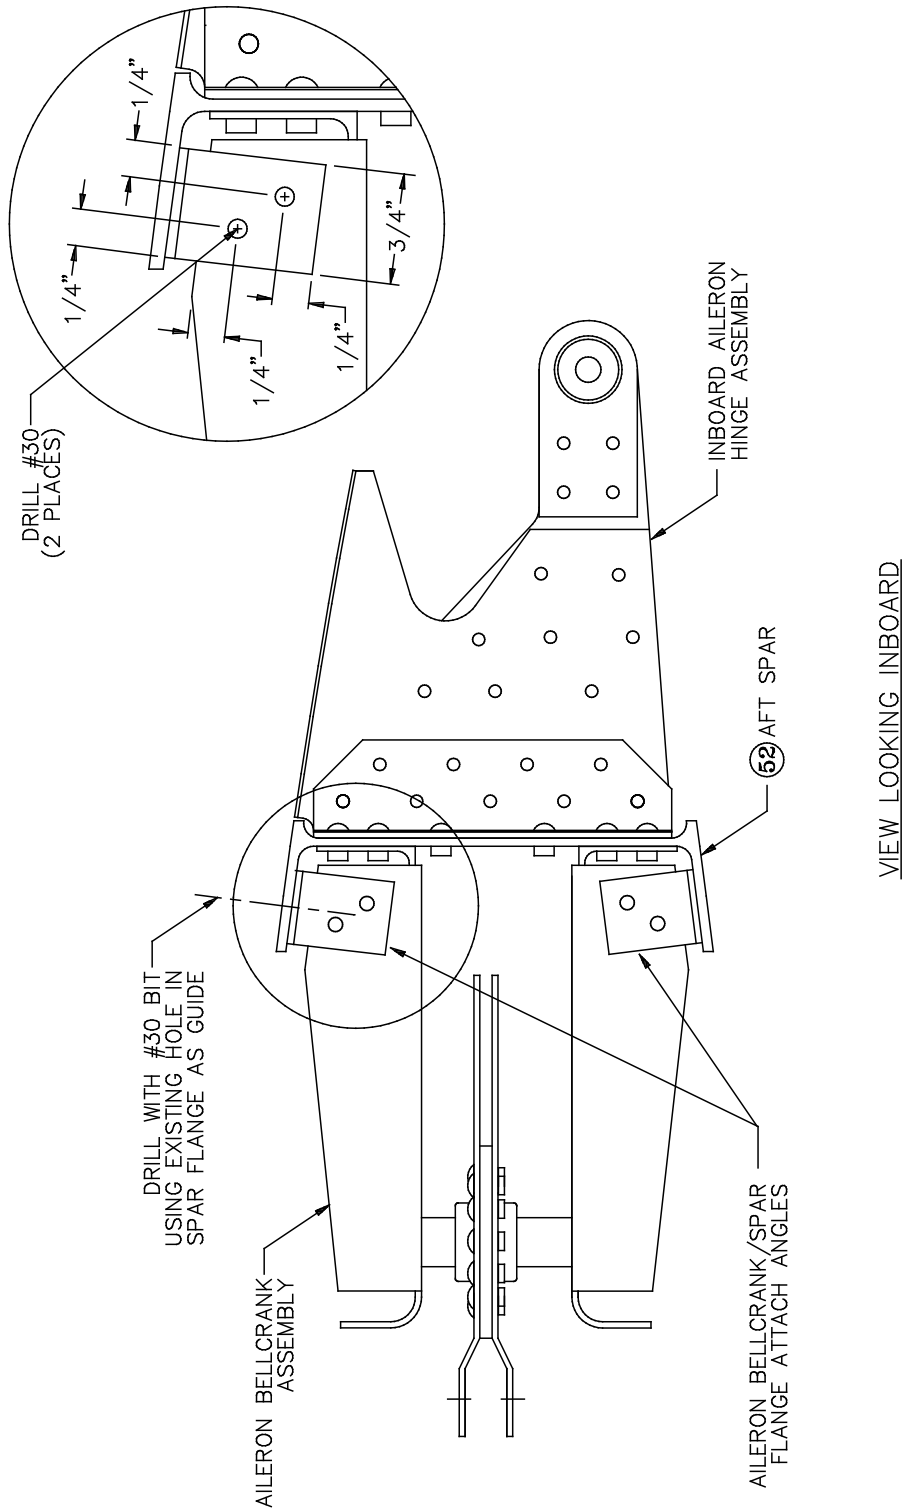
Bellcrank Bracket/Spar Flange Attach Angles
